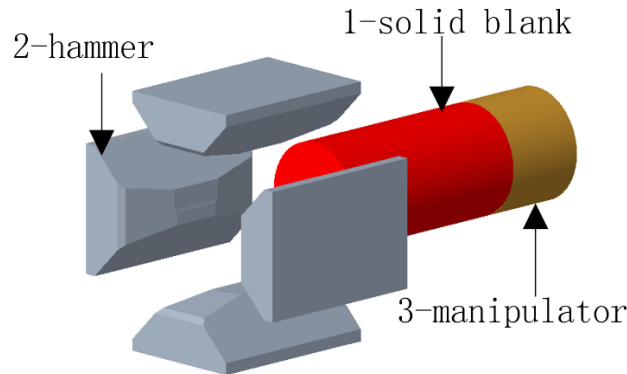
Numerical simulation CAD model of four hammer head radial forging solid blank.
